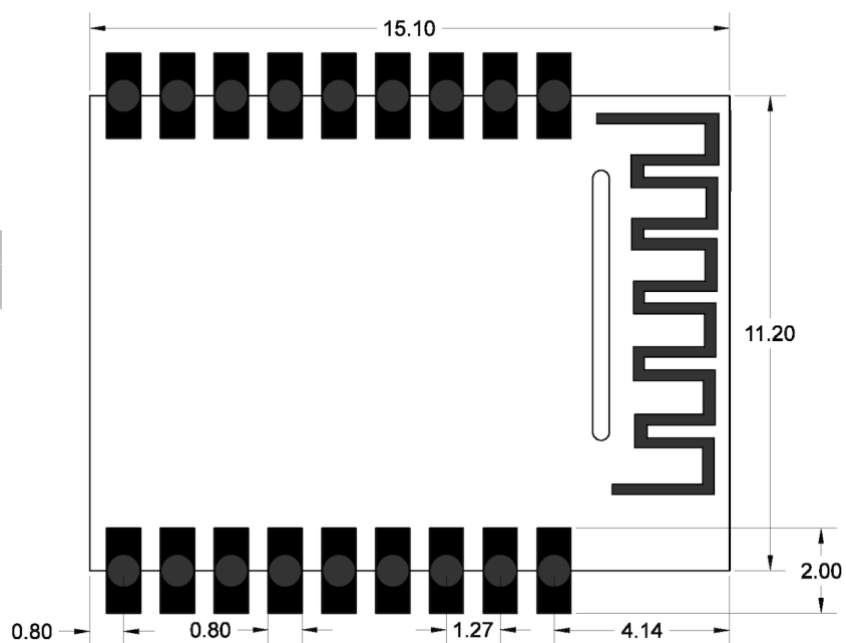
Recommended PCB Layout of NDB-2658A (mm)
